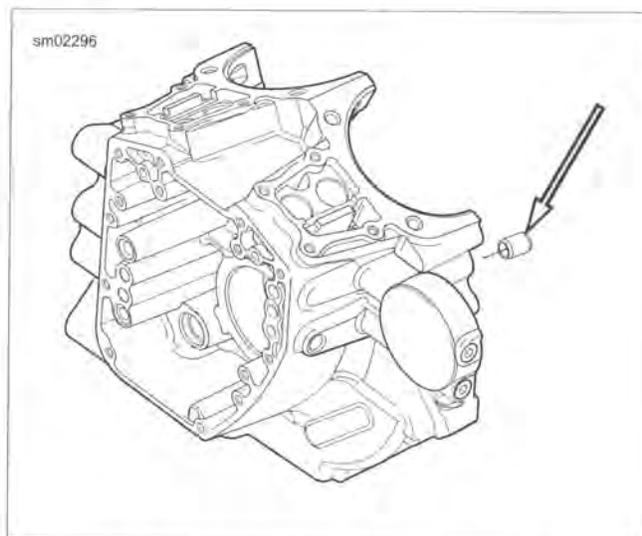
Right Crankcase Forward Dowel Pin (Rear Dowel Pin Not Shown)
